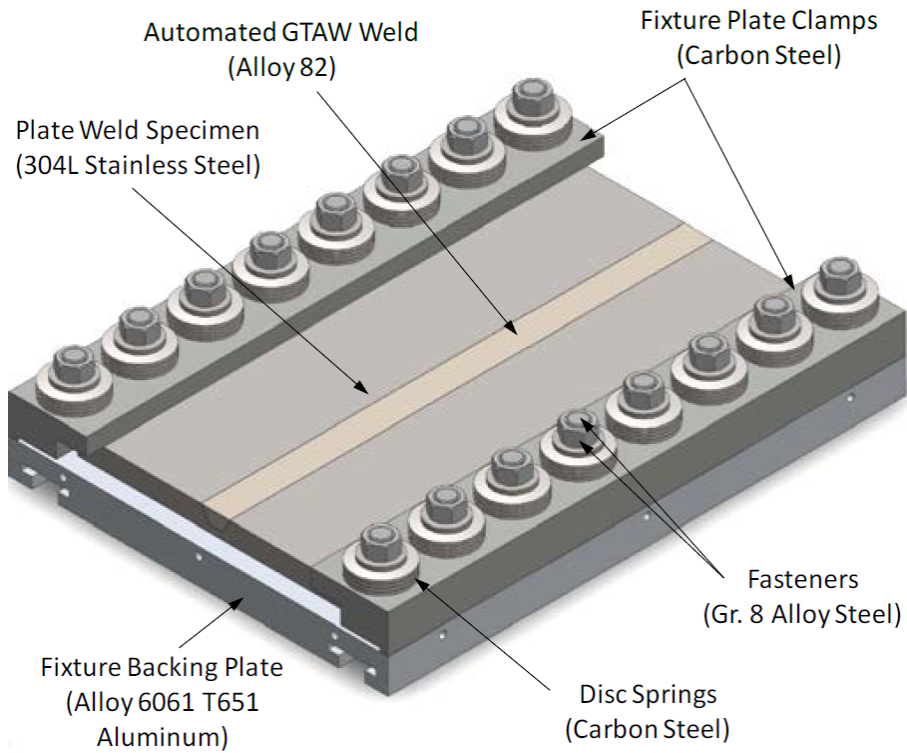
Welding Restraint for Plate Specimen (Courtesy: EPRI)
